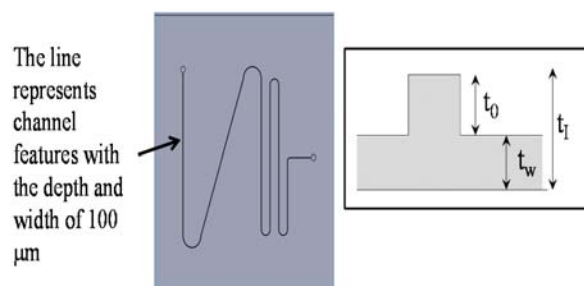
Embossing mould design (left) and mould cross section to illustrate mould thickness (t_1), channel height or depth of cut (t_0) and machined thickness (t_w) (right).
